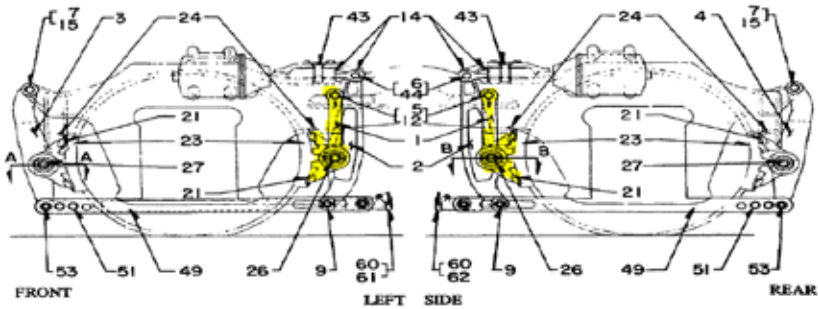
GP Clasp, inside, Live-Lever Brake Head Assembly locations (steel brake hanger ferrule with thermoplastic bushing)
